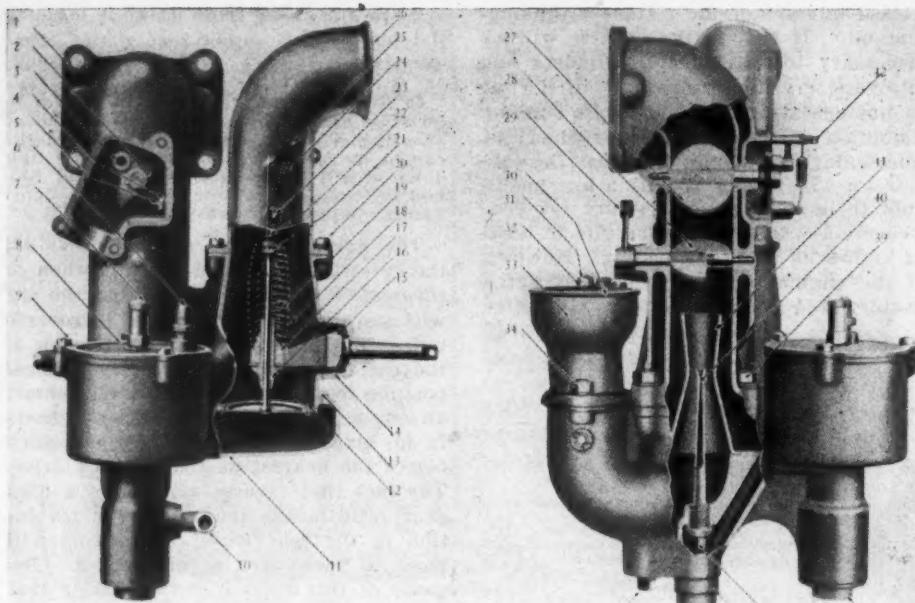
Two views of the Packard truck carburetor showing points of adjustment
